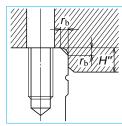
Shoulder for the Fig. 10 Shoulder for the ball rail datum face
